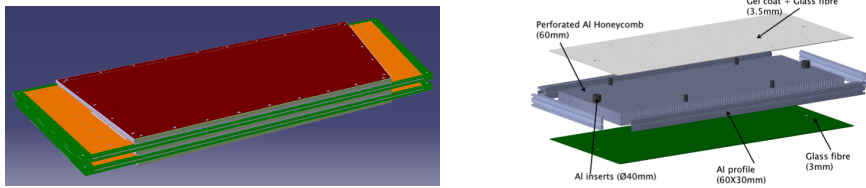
Left: Drawing of the micromegas quadruplet. The two larger planes are the readout panels, sandwiched between two external and a central drift panels. Right: exploded view on the assembly table.
